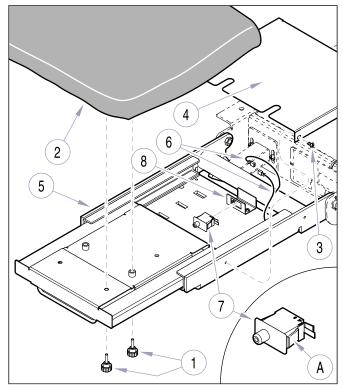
Foot Rest Extension Limit Switch Removal / Installation
